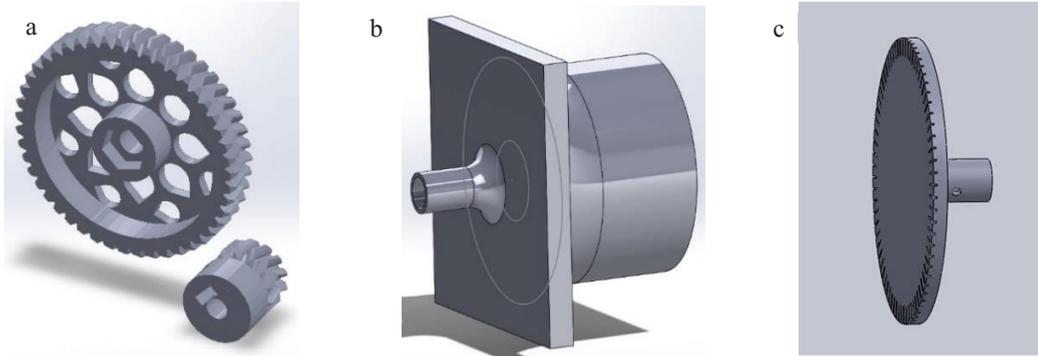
(a) Herringbone gear (b) Bone holder (c) Input handle
